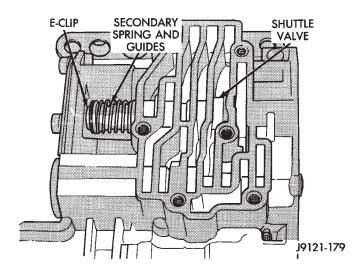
Shuttle Valve E-Clip And Secondary Spring Location
